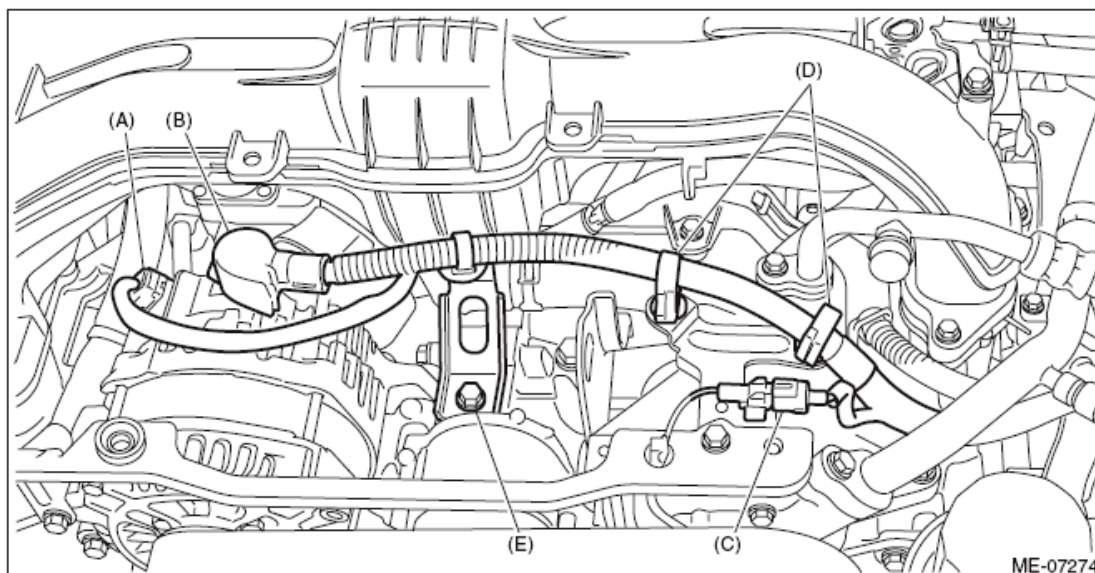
Identifying Generator Connector, Terminal, Bolt And Clip
